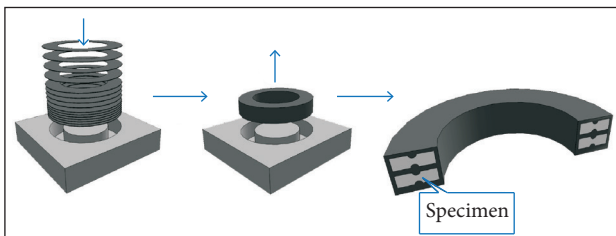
Scheme from molding the nozzle extension entrance blank and cutting the Iosipescu specimens.
